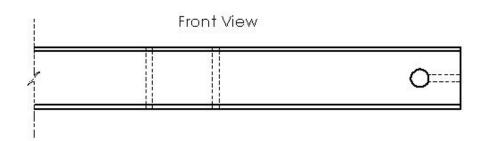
A-Series, PDL & TDL Treadle Pulley Support Cross Members (Front and Rear) Holes
